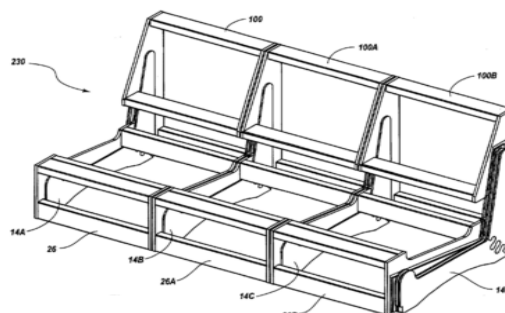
Perspective view of a modular furniture system assembled in the form of a chair [14].
